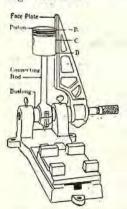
A connecting-rod and piston aligning jig or fixture. Note that the test is for the purpose of ascertaining if the connecting-rod is bent sidewise or if cross bore of piston is accurate (meaning that the pis-ton-pin when inserted will be parallel to the crankshaft).
